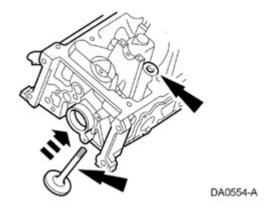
Installing Valves In Valve Guides Courtesy of FORD MOTOR CO.
